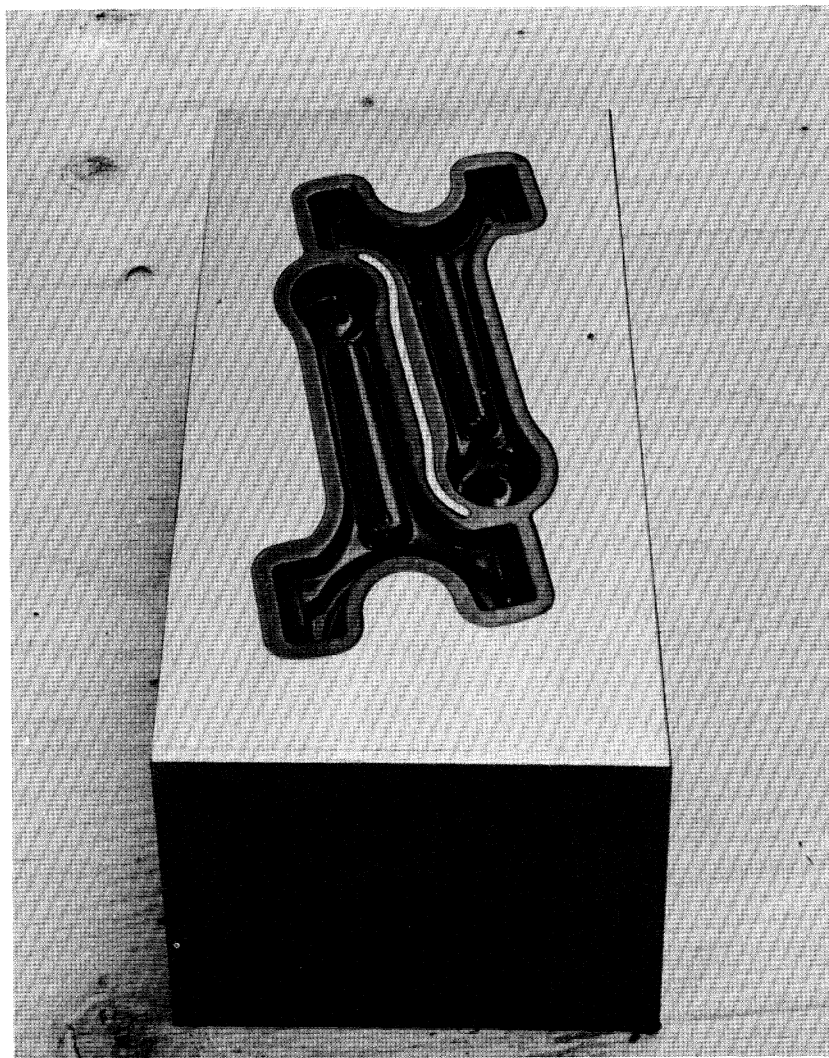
Die sinking press work, manufactured by e.c.m. (Courtesy Matchless Machines Ltd).
